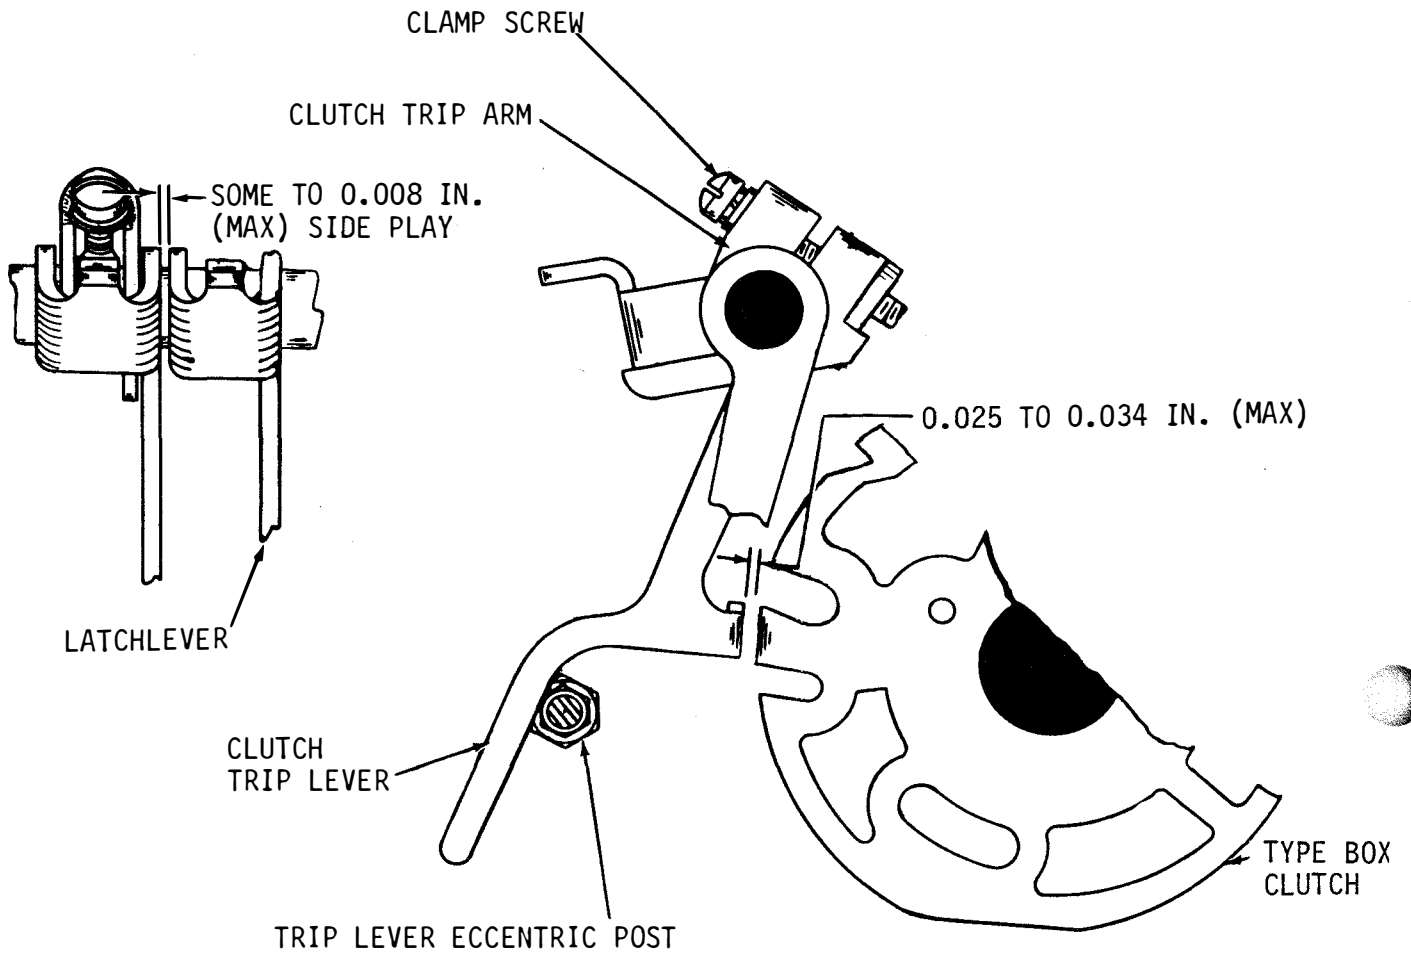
Type Box Clutch Trip Lever, Left Side View
